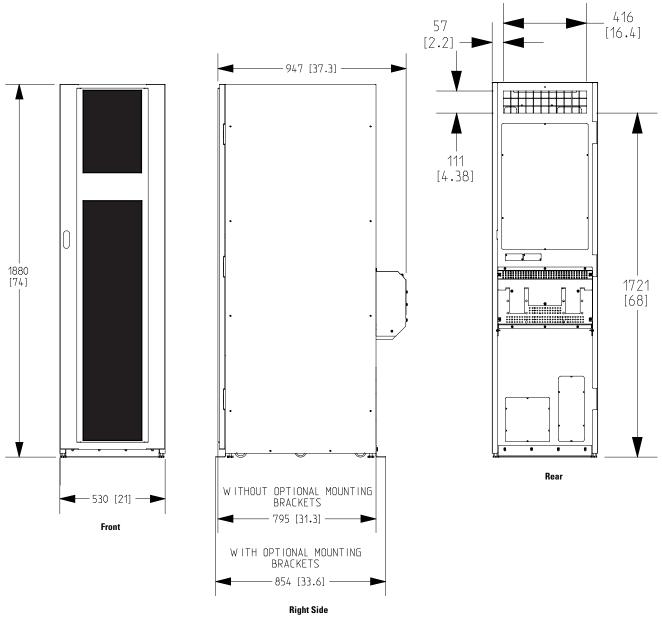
93E 60IAC-T, 93E 60IAC-B, 93E 60IAC-TB Cabinet Dimensions (Front, Right Side, and Rear Views)
